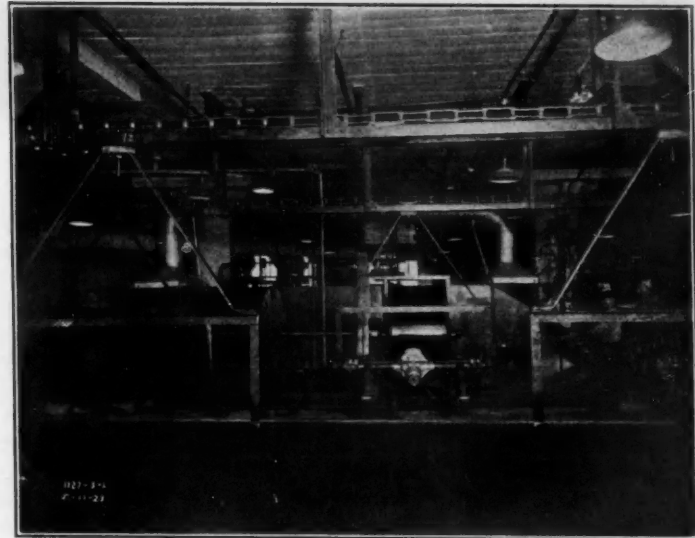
AXLE WASHING AND LOADING END OF AXLE PAINT CONVEYOR
